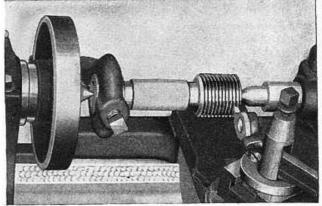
Threading a Master Thread Gauge on the 9-inch Quick Change Gear Lathe
